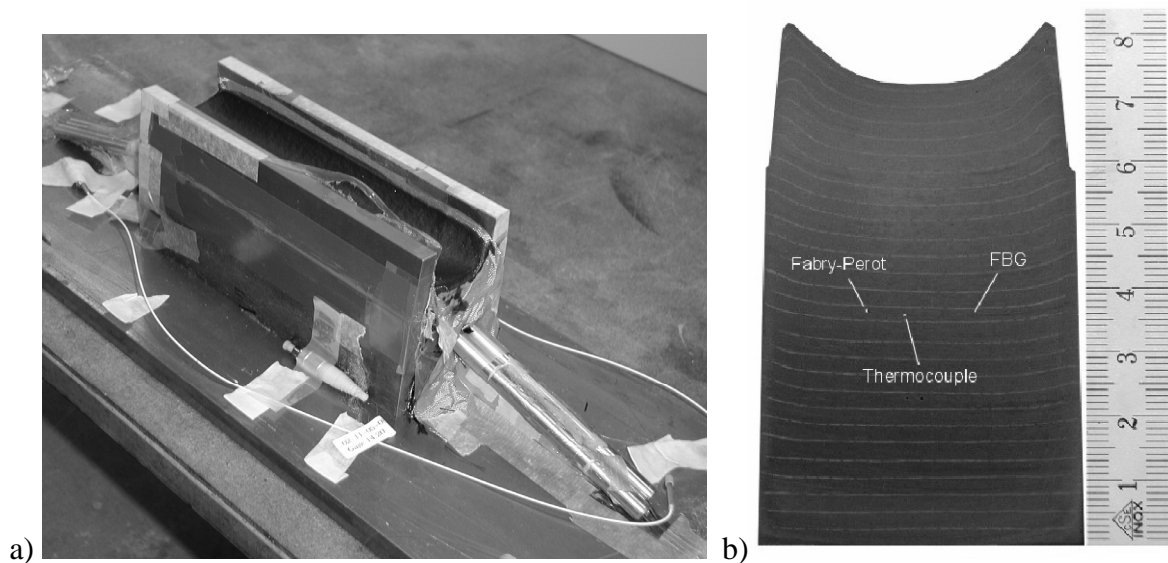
a) Composite block in mould. b) Cross-section of specimen indicating actual positions of optical sensors and thermocouple
